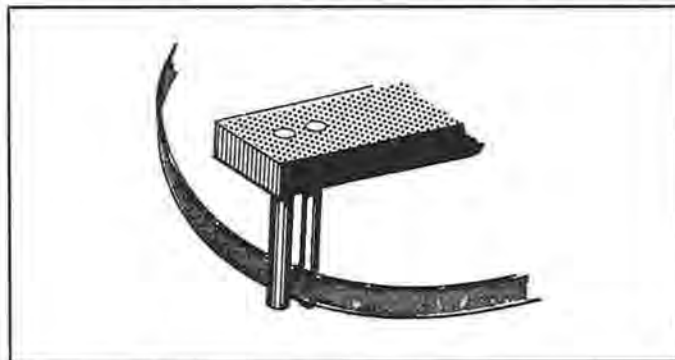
Regulator pins should be only long enough to extend slightly below the bottom of the overcoil.
